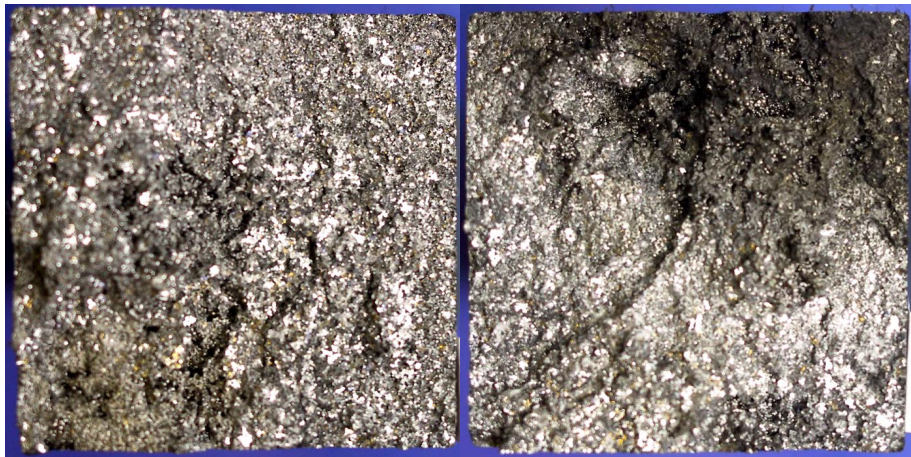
Fracture surfaces of two specimens. Specimen 1.3 on left had the best fatigue resistance in the “defects” sample. Specimen 2.1 on right had a poor endurance.
